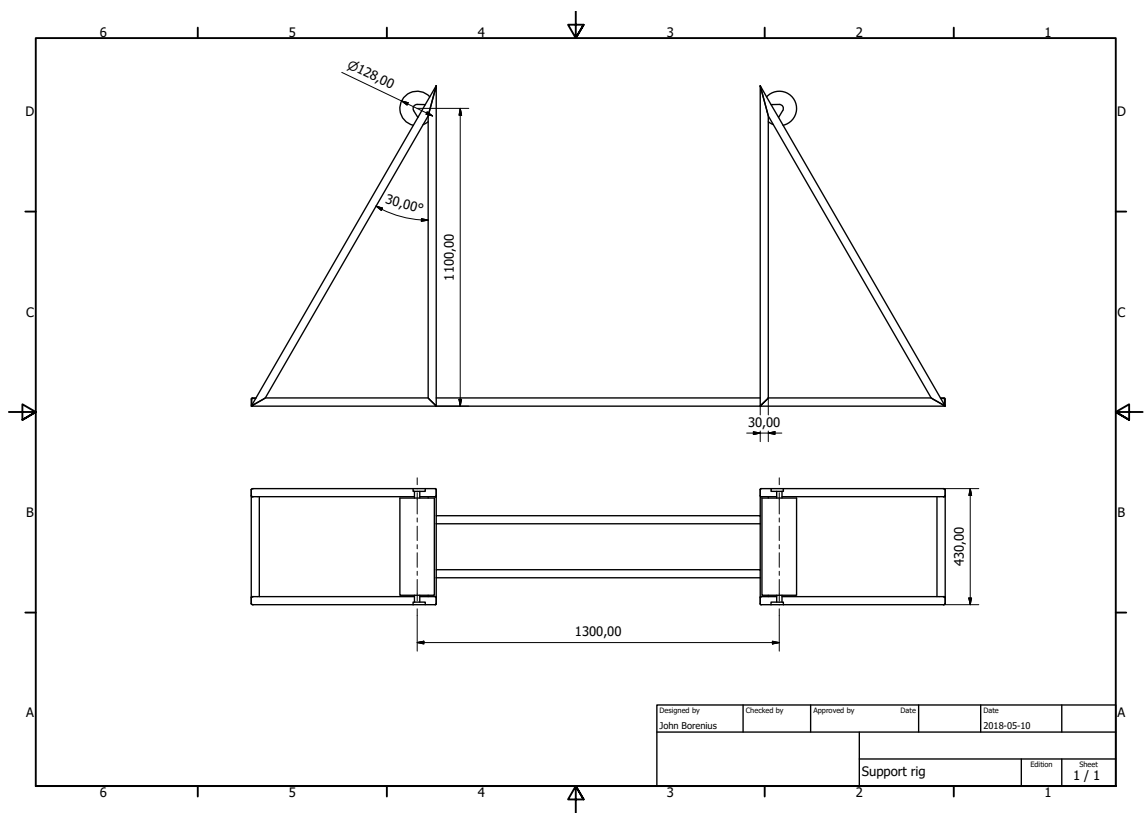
Drawing of the test rig supports with only the vital dimensions.
